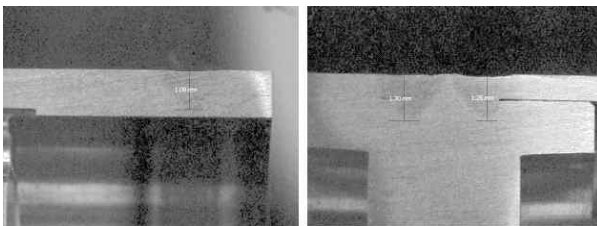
Macro cross-sections of Zr-4 end cap welded specimens($\times 40$)
